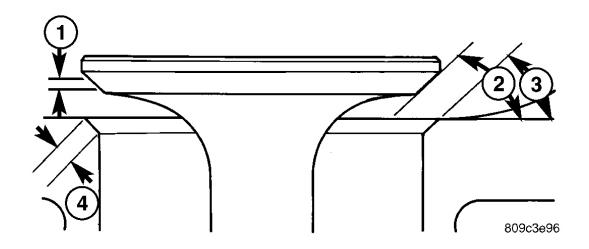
Identifying Valve Face & Seat Courtesy of CHRYSLER LLC
